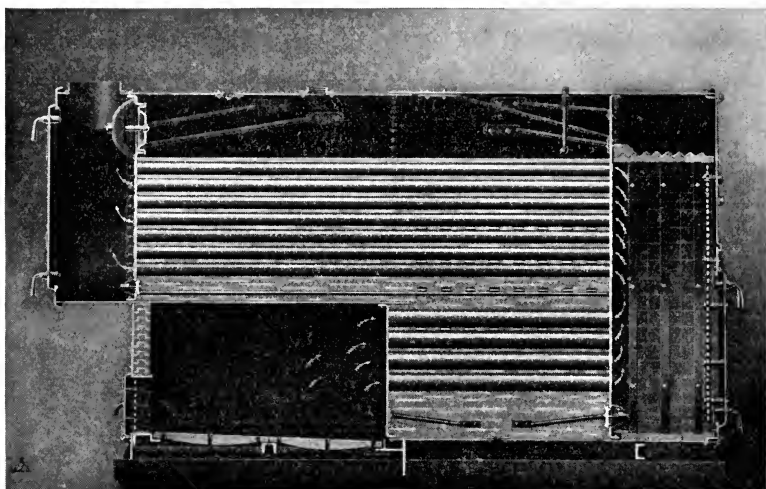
Longitudinal section of portable fire-tube boiler.
